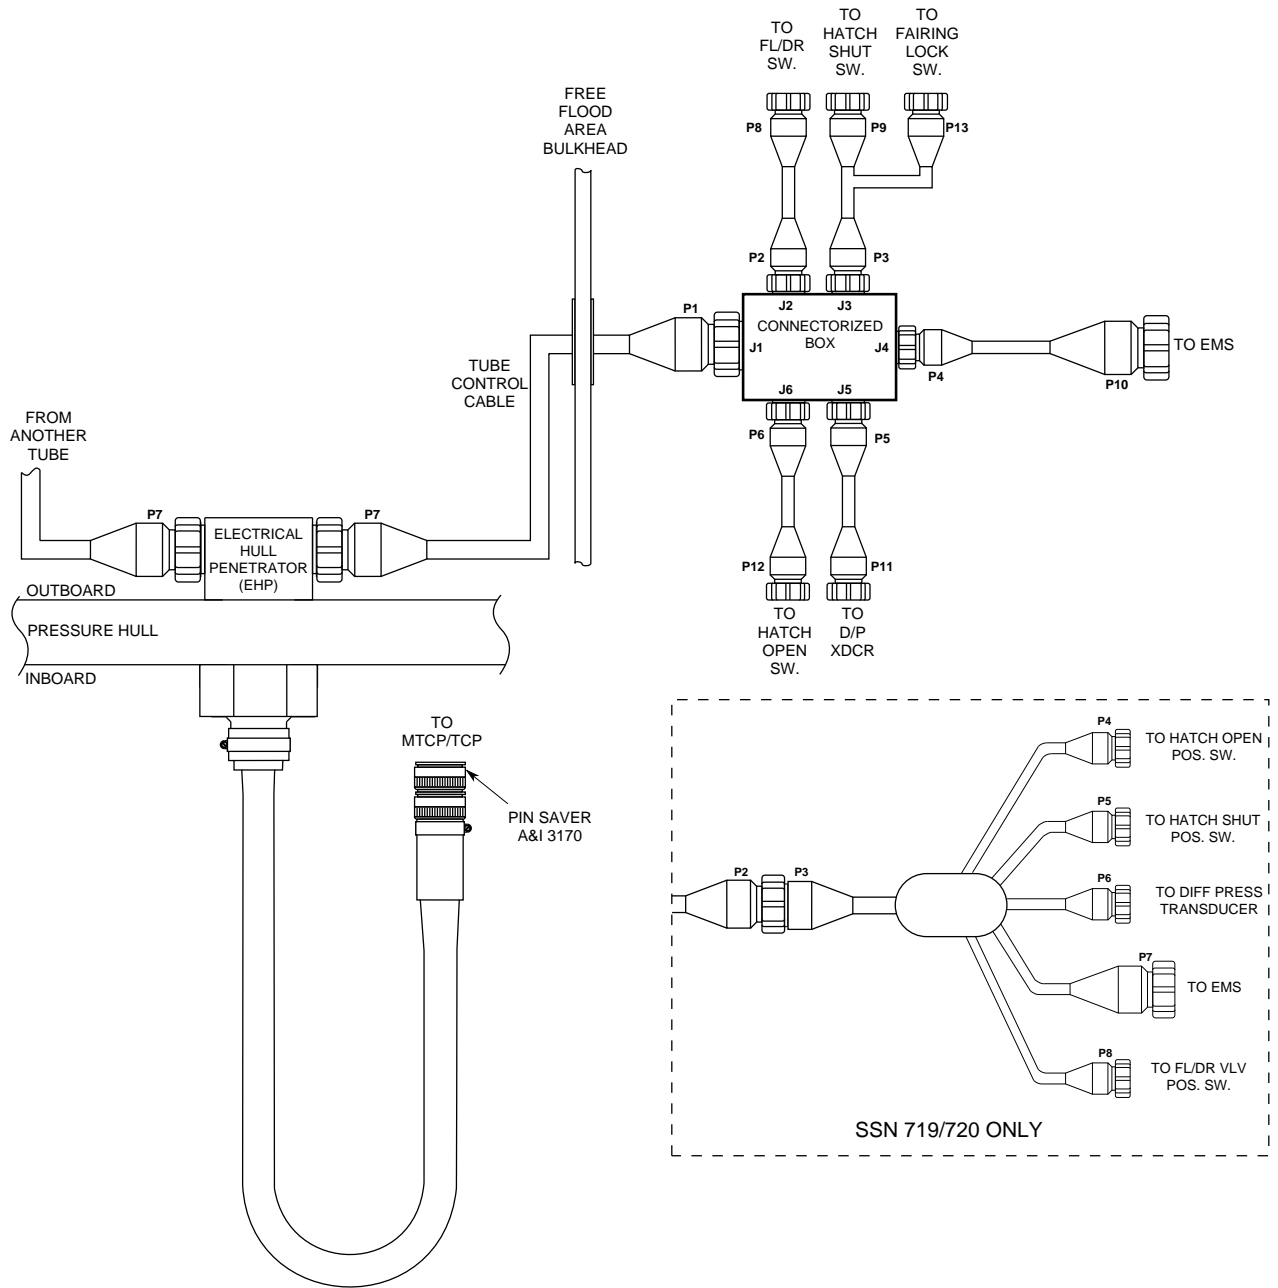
Missile Tube Control Cabling (Typical)
